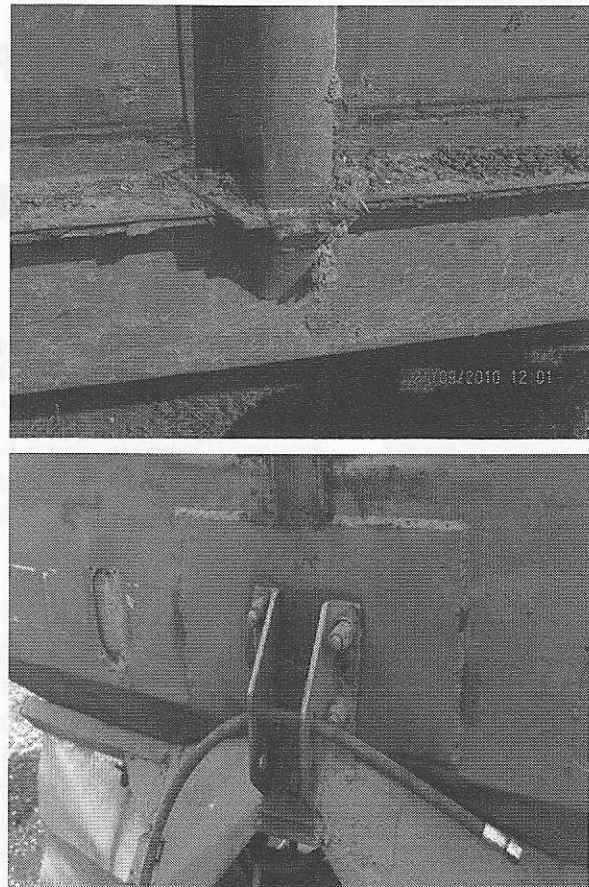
Welded fatigue failures of light-gage sheet metal structures of trailers.
